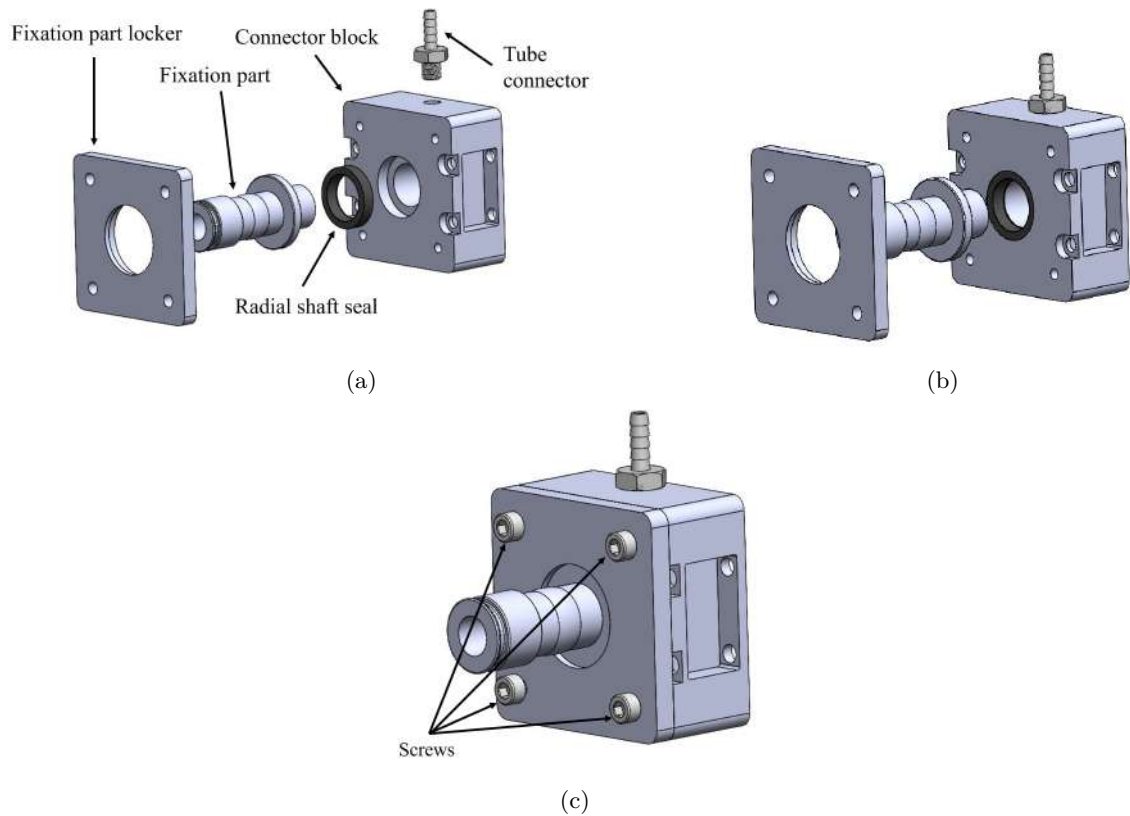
Inlet side of the inflation module. (a) Module's different components. (b) Radial shaft seal is inserted in the bore, fixation part is aligned with the hole on the connector block and with the seal. (c) Fixation part is inserted in the hole of the seal, fixation part blocker is screwed to the connector block to hold the fixation part.
